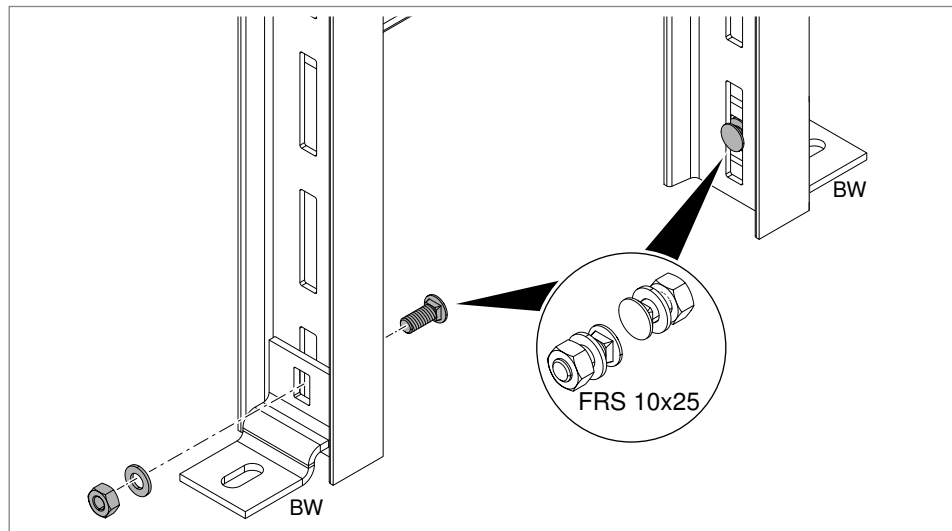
Fasten fastening bracket BW to vertical ladder SLS
